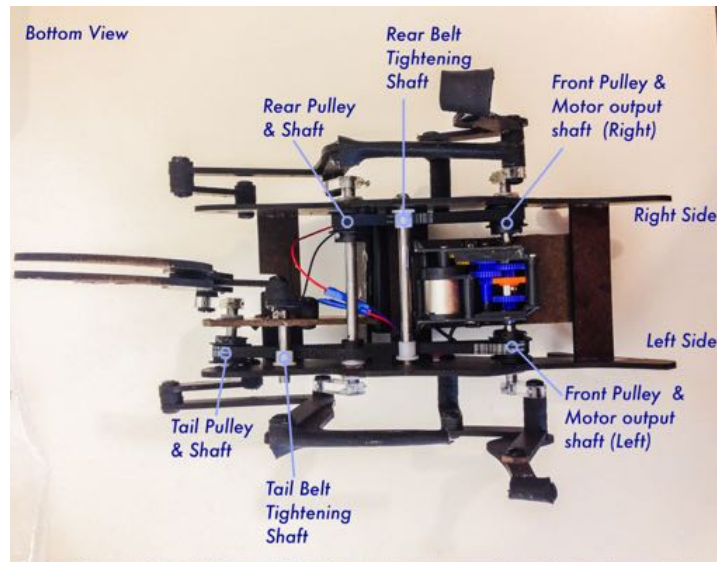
Overhead view of pulleys, belts, and axles that transfer power from the motor to the legs and tail.
